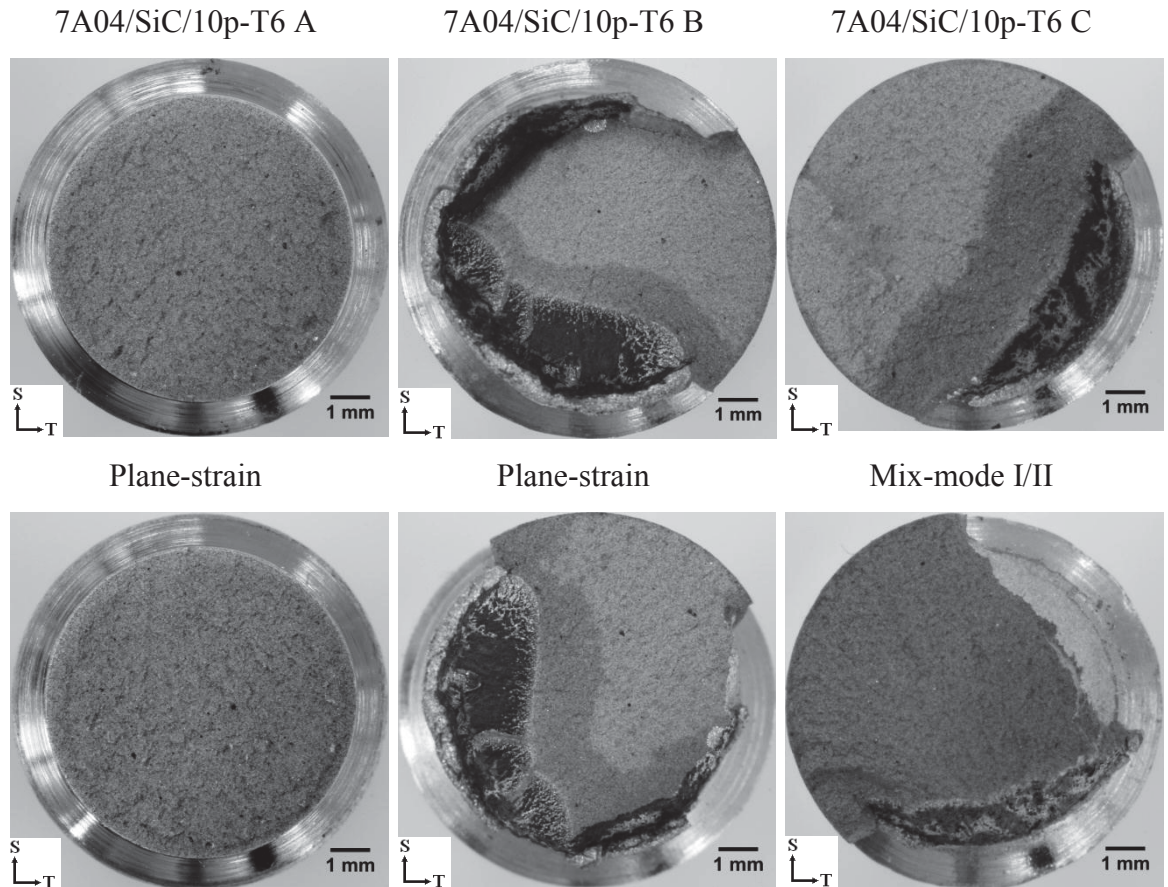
Circumferential notch tension precrack fracture surface for 7A04 /SiC/10p-T6 MMCs. The top and bottom fractographs for each column are the matching fracture halves for each specimen. The letters A, B and C are used in this section to designate the test specimens.
